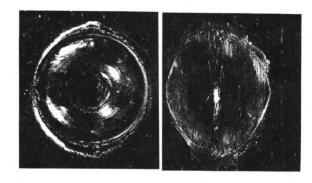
Ultrasonic Spot Welded Samples
